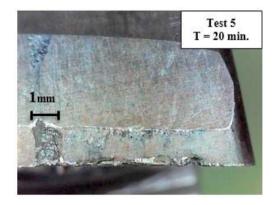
Chipping and non-uniform flank wear of the tool for trochoidal milling tests.
